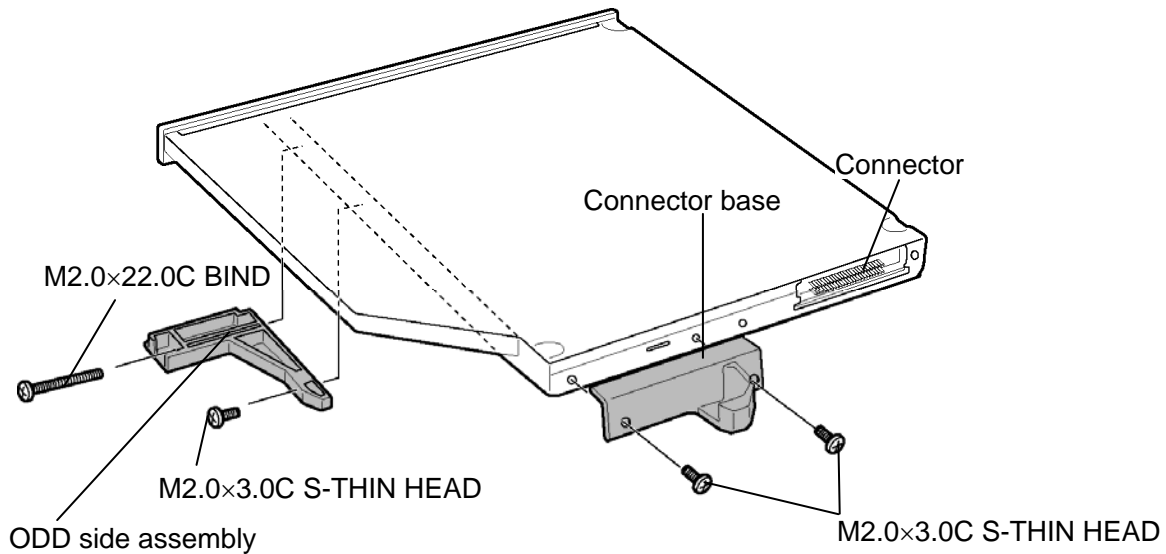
SATA Detaching the optical drive assembly(PORTÉGÉ M750 only)
